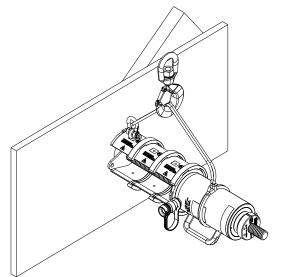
Pin Puller Assembly Installed & Supported (Typical)
